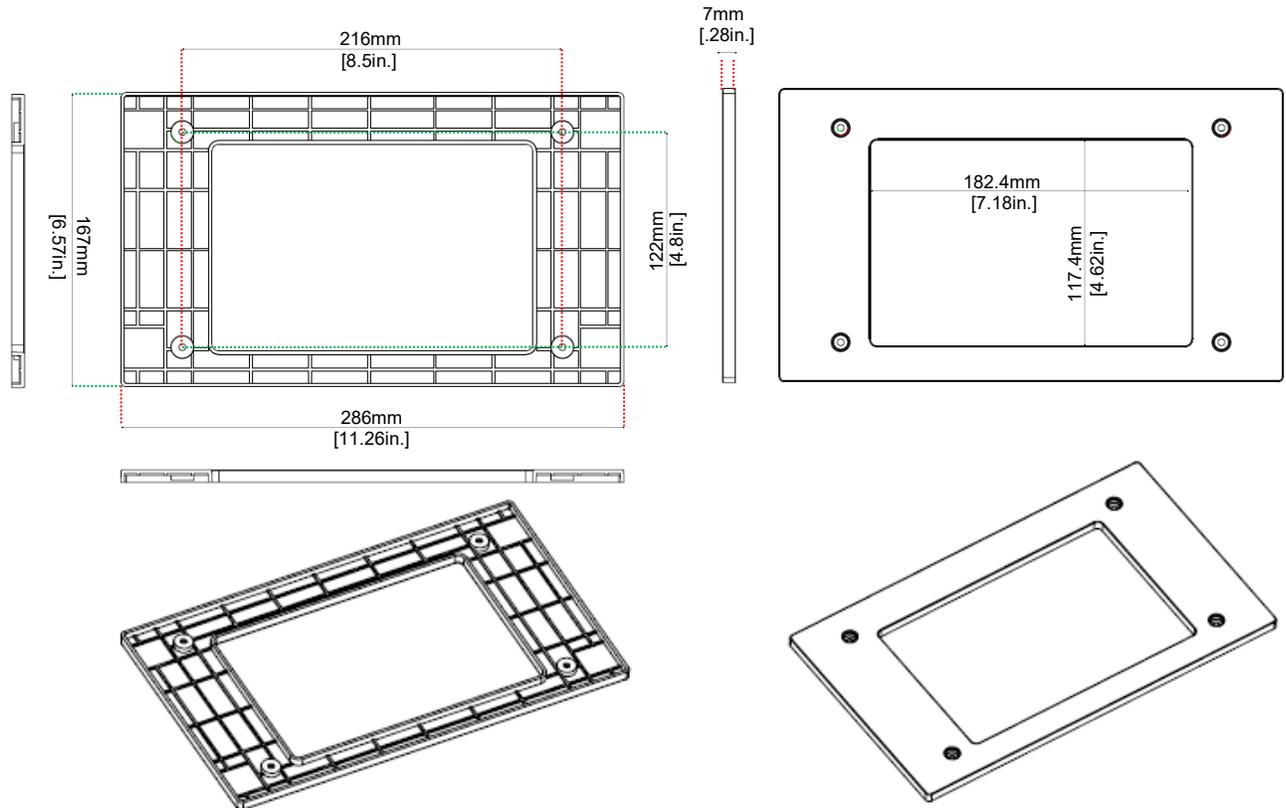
APV3-DAS - Flush Mount Front Plate Dimensions
